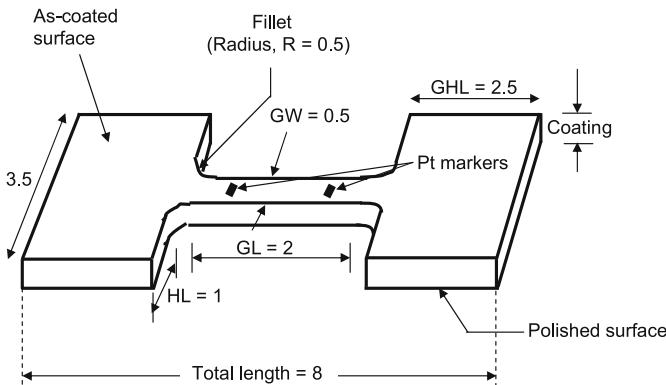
Schematic showing the sample configuration used in the present study. GL, GW, HL, R and GHL represent the gage length, gage width, holding length, fillet radius and grip head length, respectively. All dimensions are in mm.
